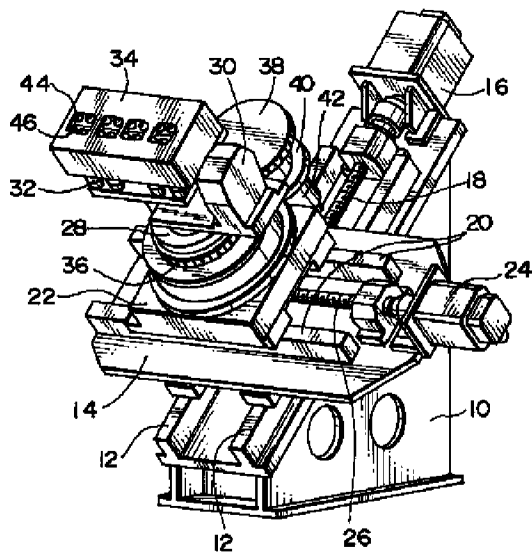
It is drawing for explaining the trouble of an apparatus conventionally which is shown in drawing 8 .
